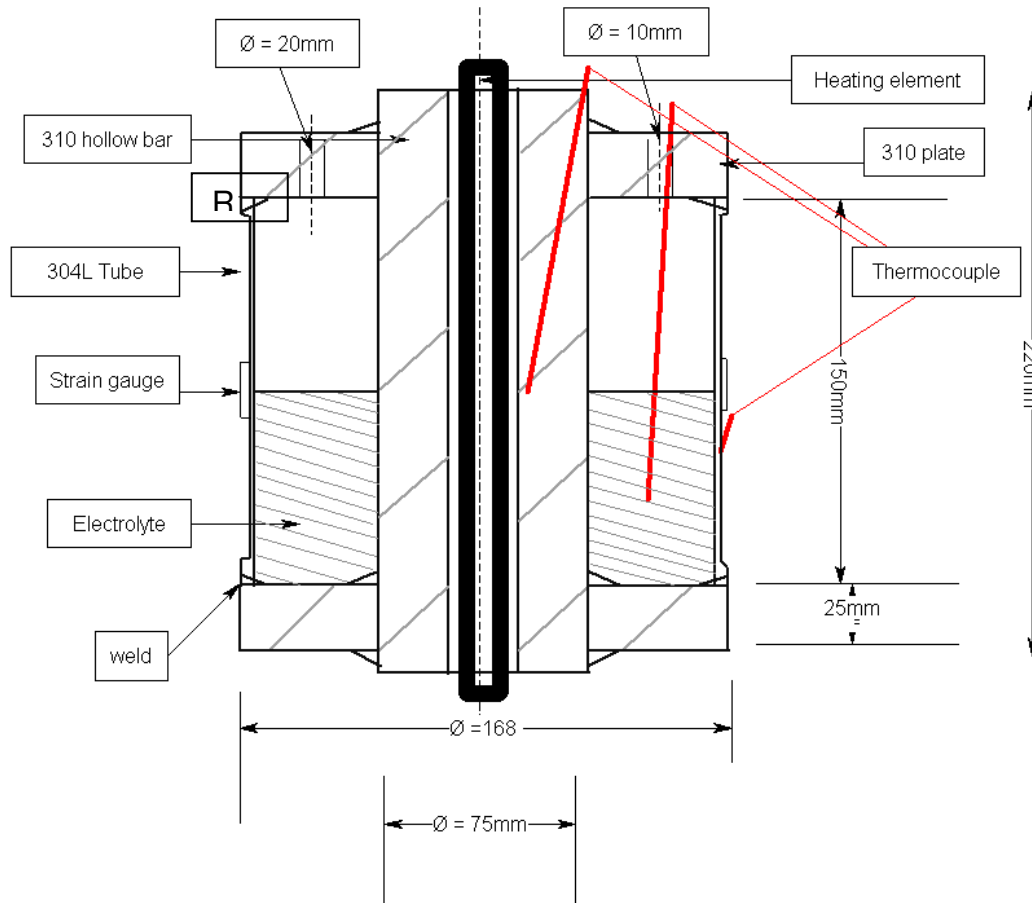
Schematic illustration of test rig. "R" shows the top weld.
